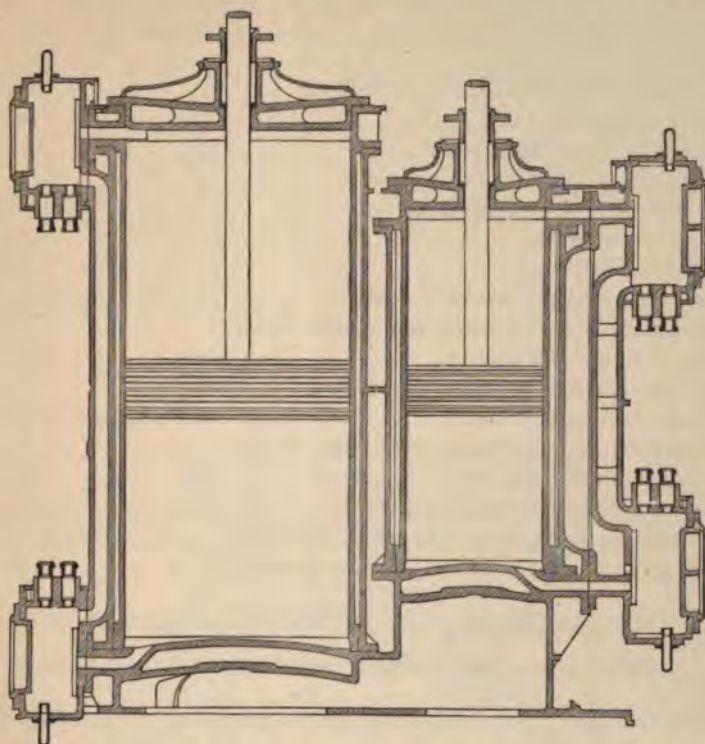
J. Simpson & Co.: Pumping Engine, Hammersmith. Cylinders. Scale 1/40th.
